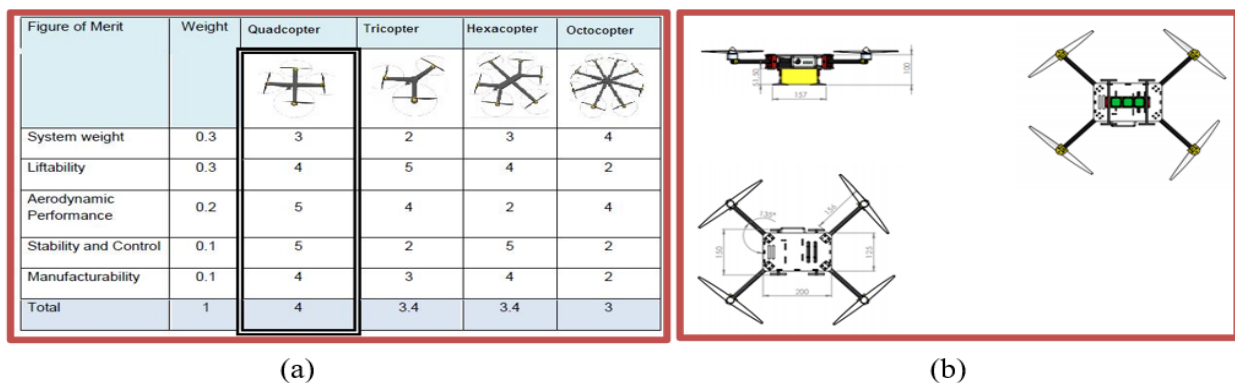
Technical drawing of DEMİR, quadcopter selection (a), and technical drawing (b).
